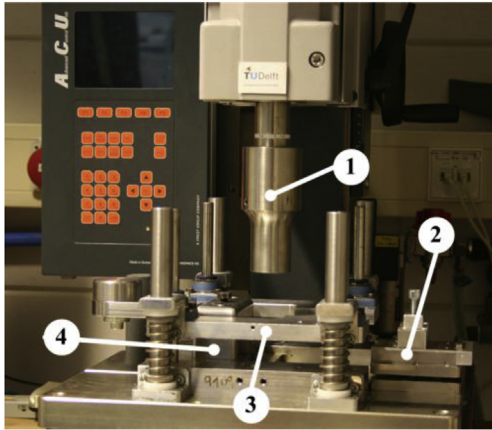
Ultrasonic welding setup: 1) sonotrode, 2) top clamp, 3) sliding frame for top clamp, 4) bottom clamp.
